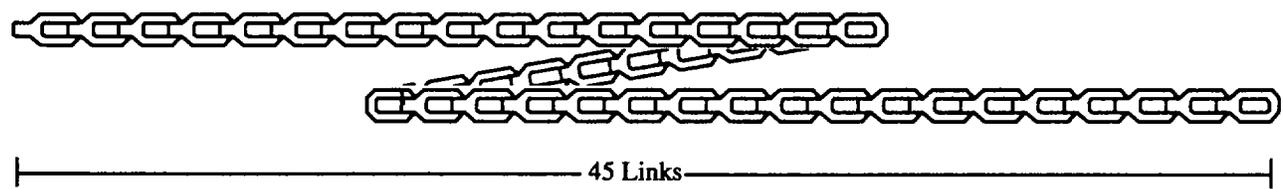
Attaching Chains, Stand Assemblies Clevis and Pivot Leg
